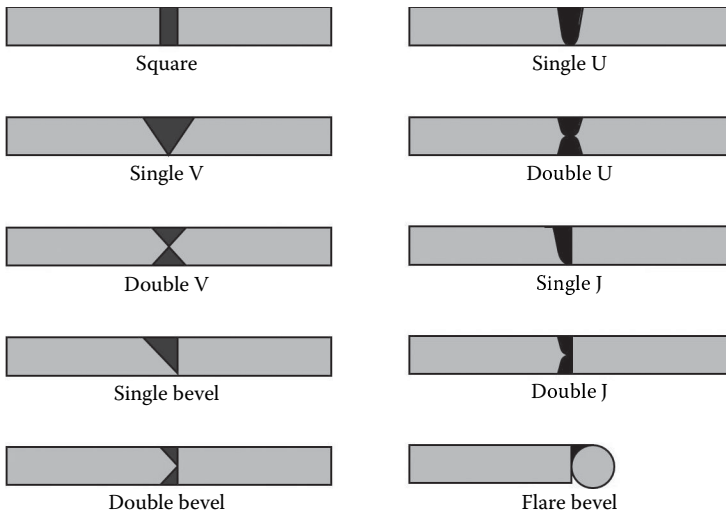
Types of groove welds for a butt joint.
